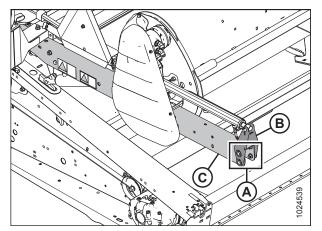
Right Reel Arm Cylinder in Forward Position
